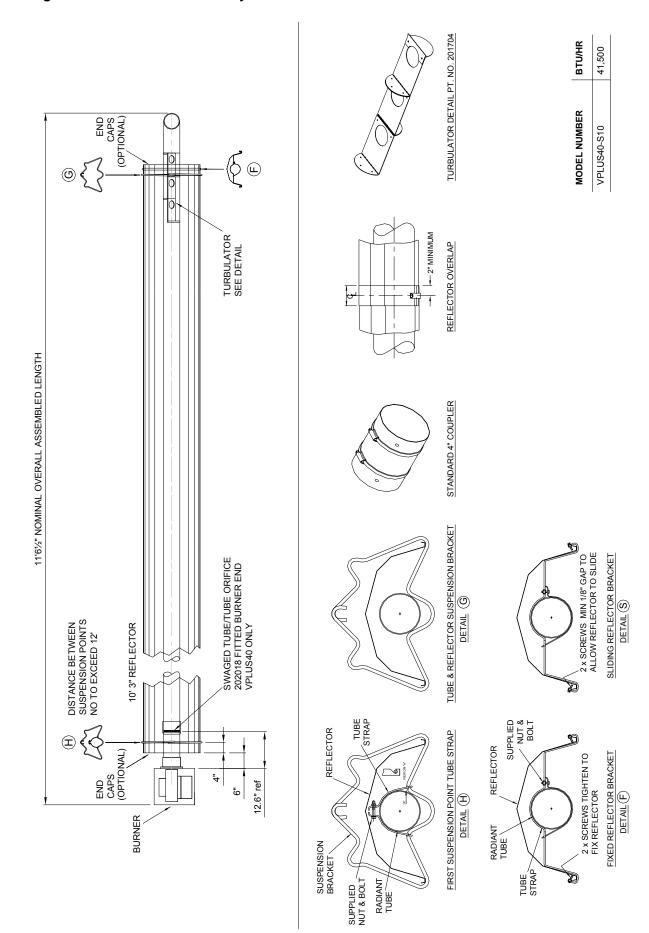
VPLUS Heater Assembly: Model Linear 40-S10.
